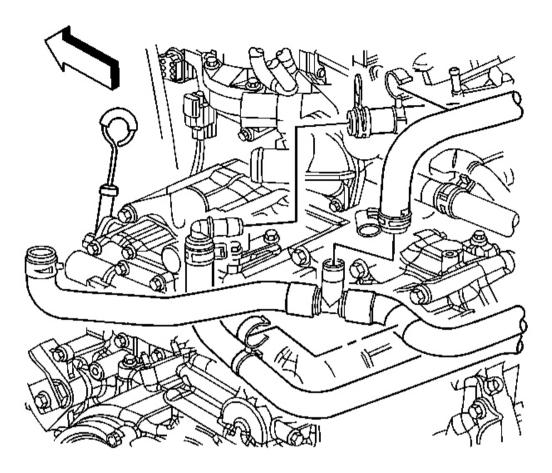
Heater Inlet Hose Clamp & Heater Core Courtesy of GENERAL MOTORS CORP.
